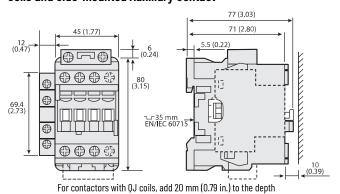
104-E09...104-E16 Reversing Contactors with Cat. No. 100-EMCA02 Mechanical and Electrical Interlock
